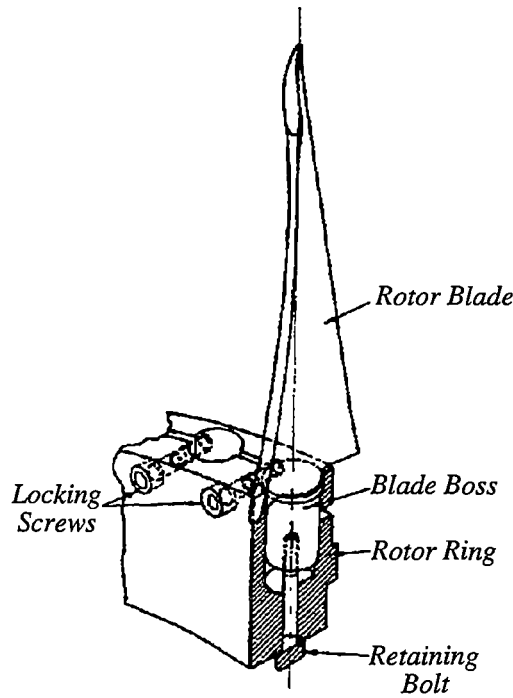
Cross section of variable-stagger rotor blade assembly
